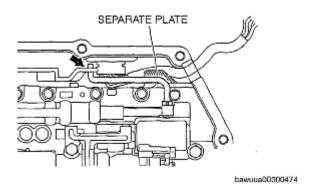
Identifying Separate Plate Courtesy of MAZDA MOTORS CORP.
